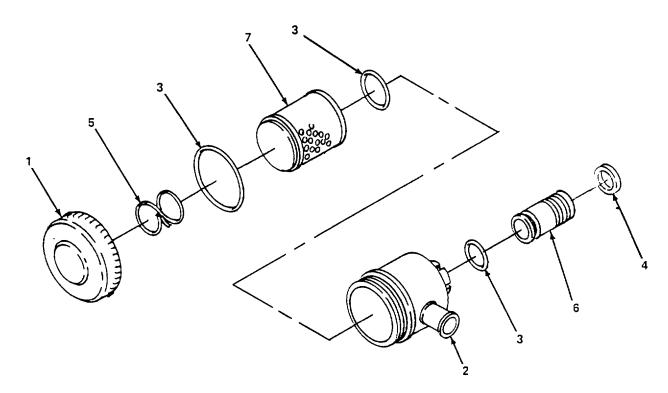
Inlet Filter and Adapter Assembly, Repair.
